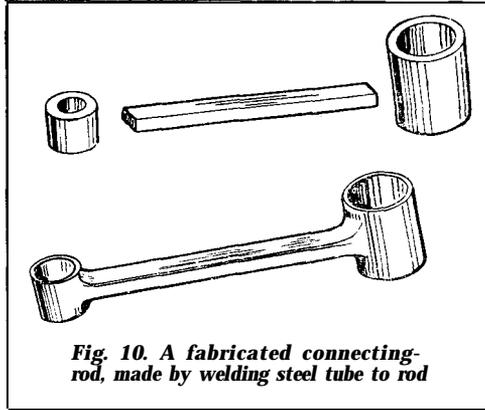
A fabricated connecting-rod, made by welding steel tube to rod
